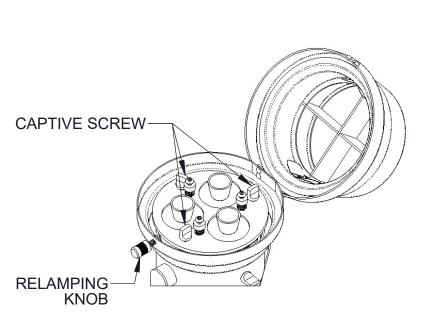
FIXTURE FRONT OPEN, SHOWING CAPTIVE SCREWS
